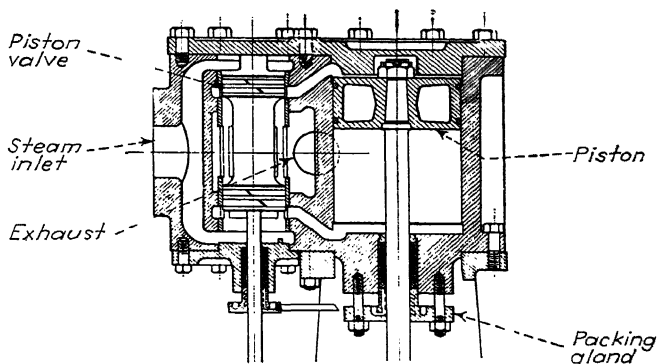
Section through a vertical engine cylinder, showing piston valve.
